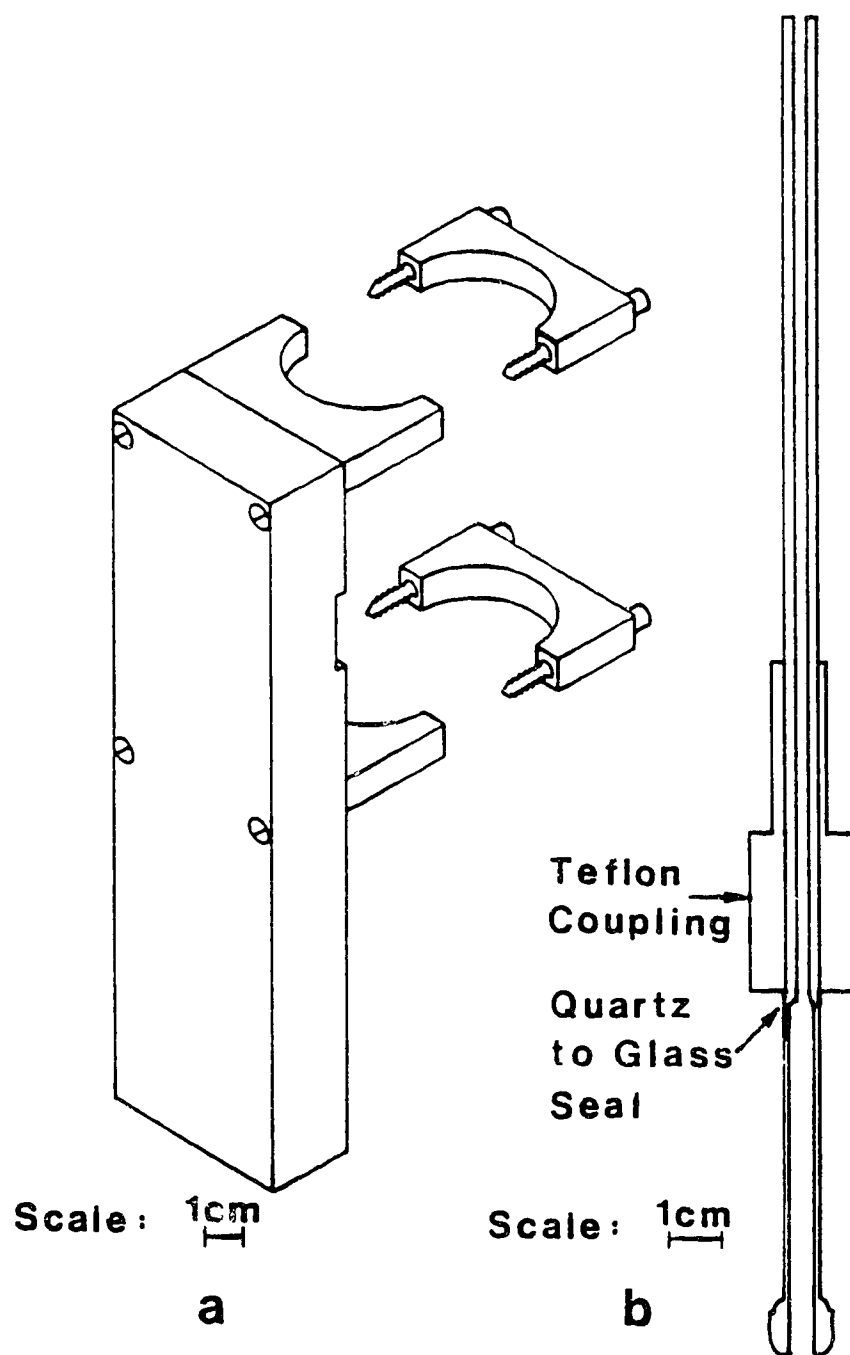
(a) Positioner clamp, (b) demountable aerosol tube.
